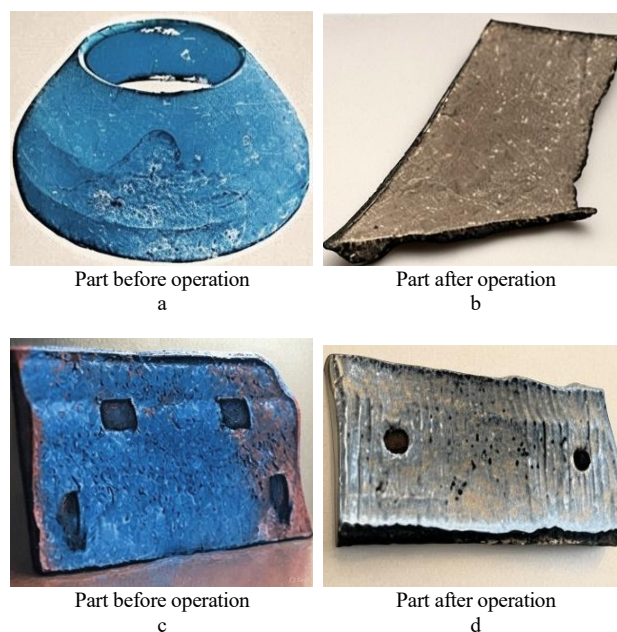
Parts of crushing and grinding equipment and quarry excavators made of 110Mn13(casting) steel: a, b – cone crusher armor; c, d – single-shaft ball mill lining (Created by the authors)
